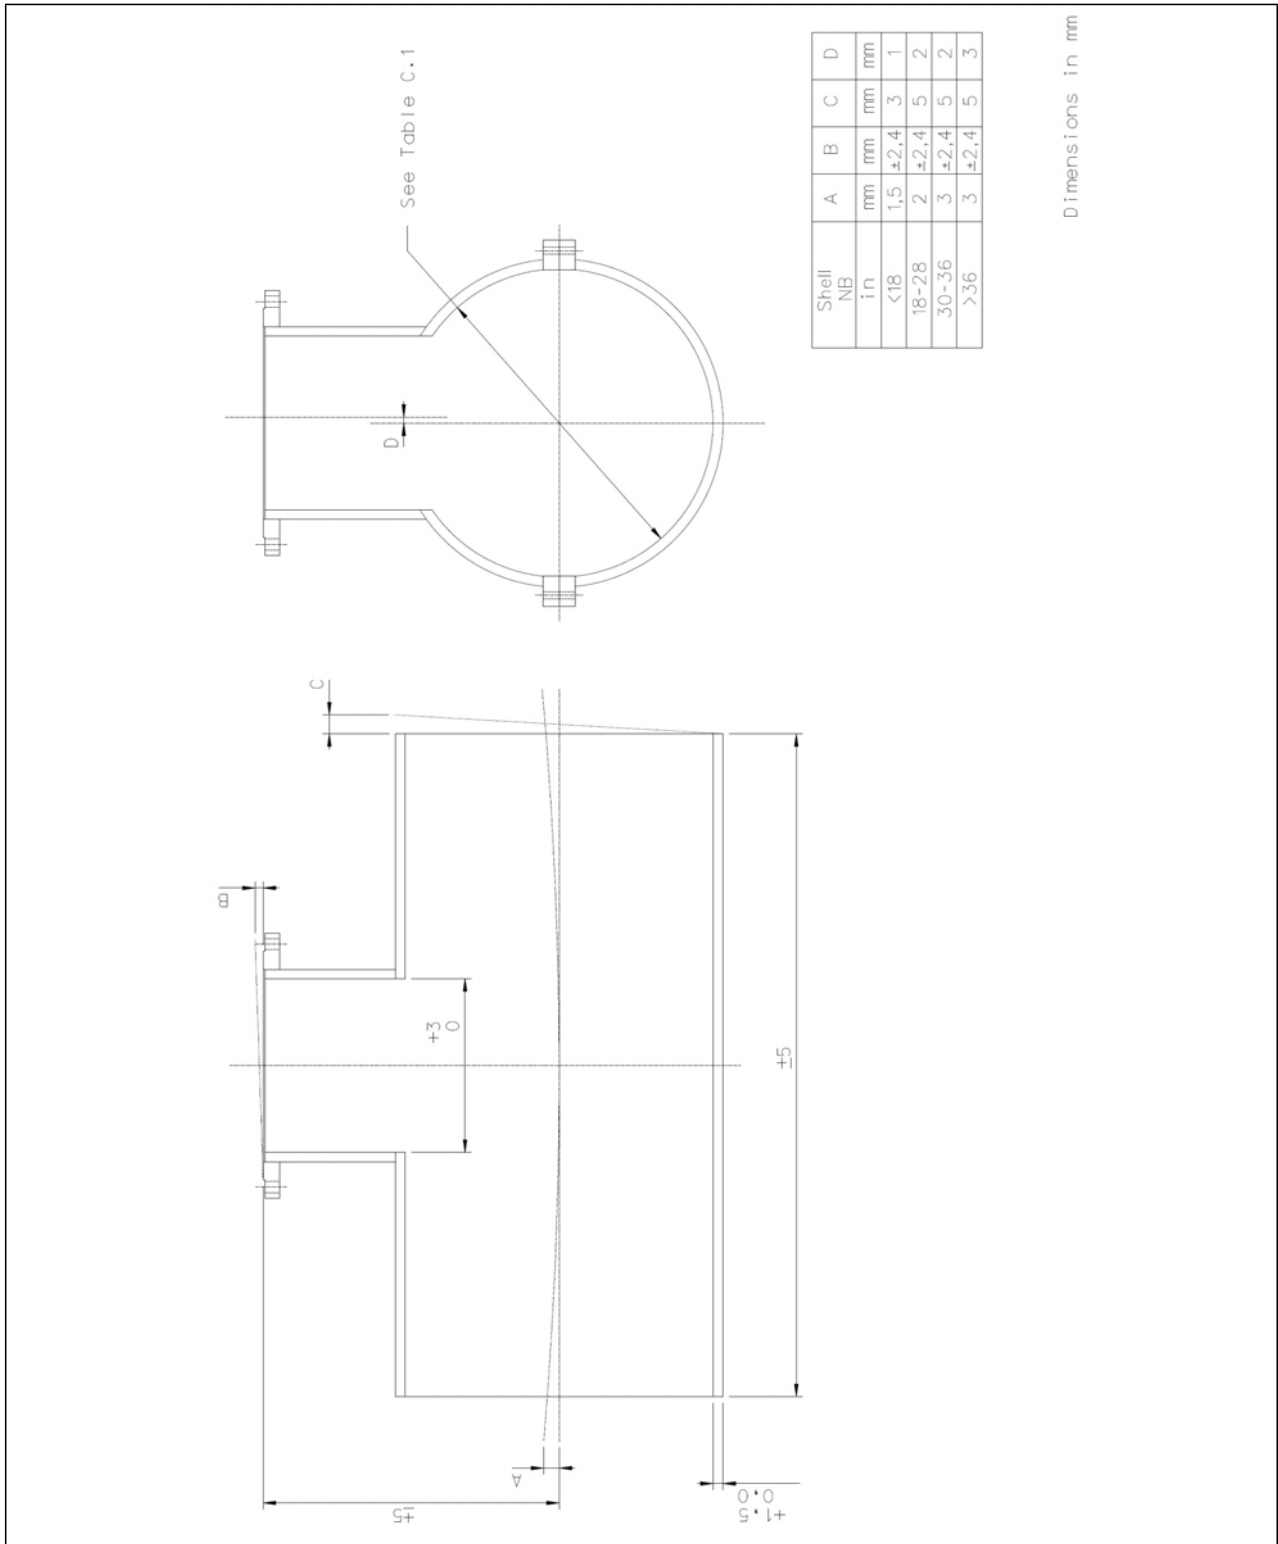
Dimensional tolerances (see 5.6)
